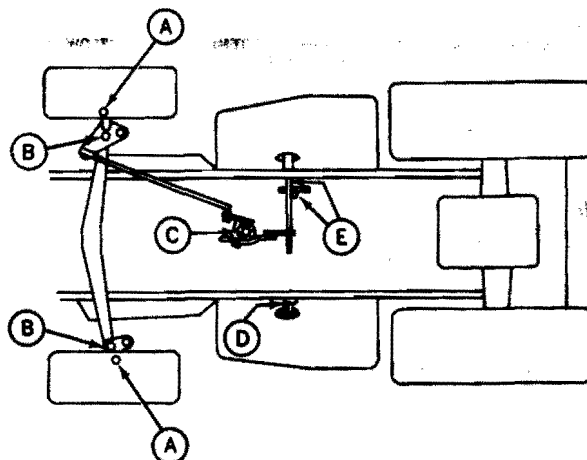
Grease Fitting Locations (Serial No. 30,001-55,000)
